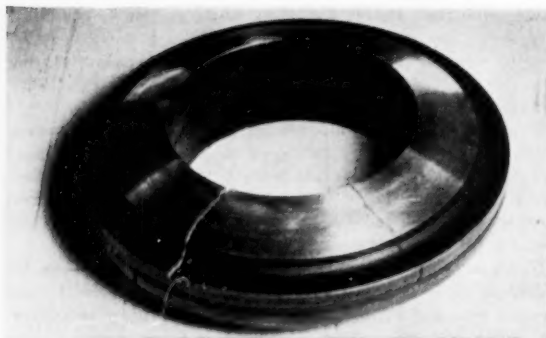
CRACKED LENS-RING GASKET MADE FROM AISI TYPE 430 STAINLESS STEEL
